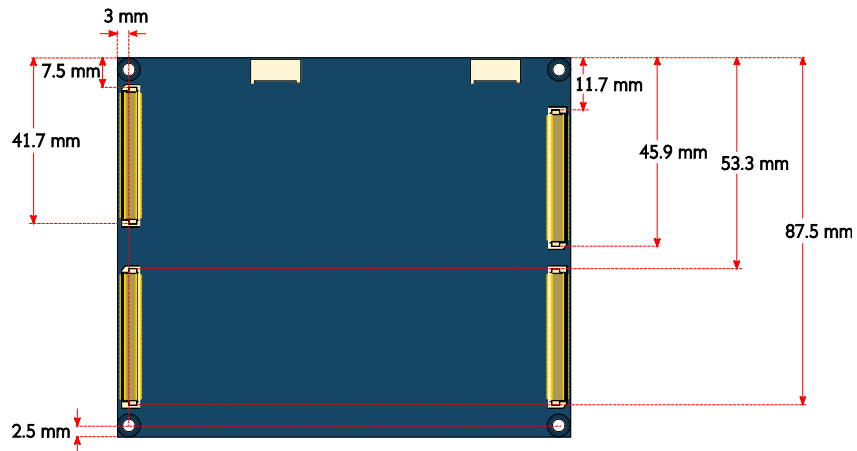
Dimensions of the VIA ETX-8X90 module (bottom view)
